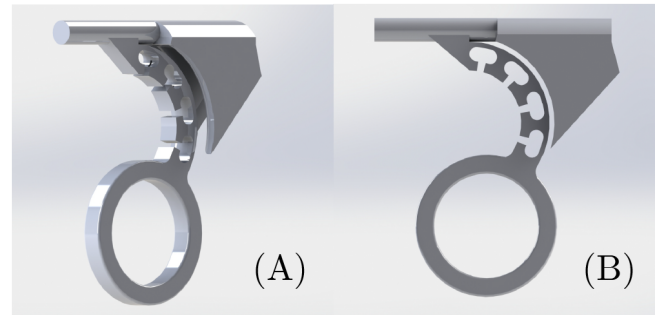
3D drawing of the initial conceptual grasper principle. A) 3D view of the SolidWorks drawing. B) Side view of the SolidWorks drawing.
